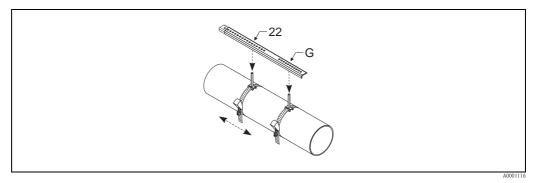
Determining the distance in accordance with the mounting rail (e.g. POSITION SENSOR G22)
